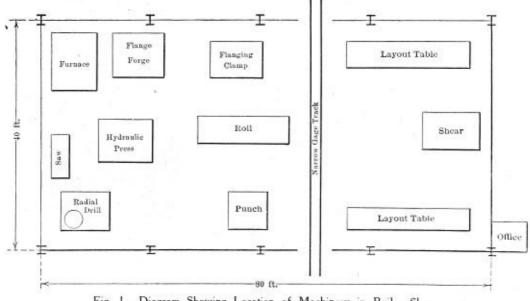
Diagram Showing Location of Machinery in Boiler Shop
